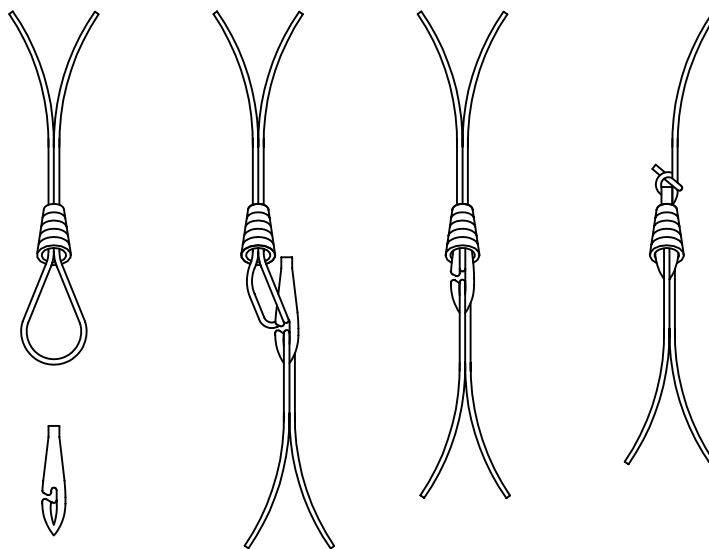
Vertical Piano SS5 Installation (viewed from sound-board side)
